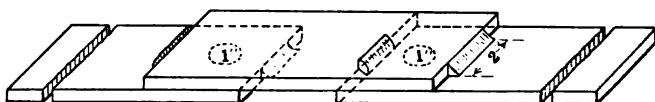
FILLET AND SPOT WELDED.
